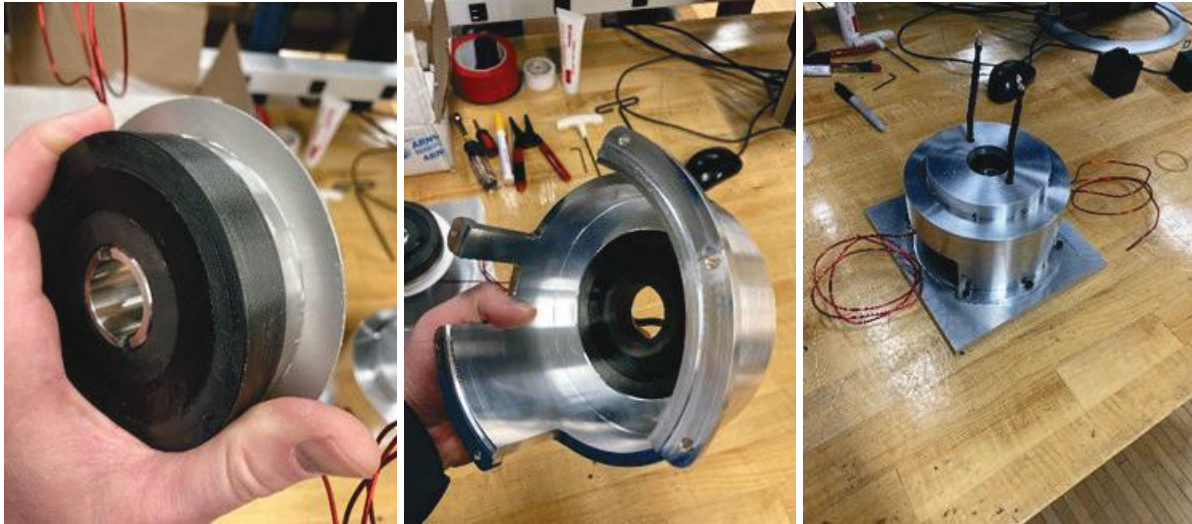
Carbon fiber wrapped rotor core, stator core embedded in aluminum housing, IPT components assembled on mock motor plate.
